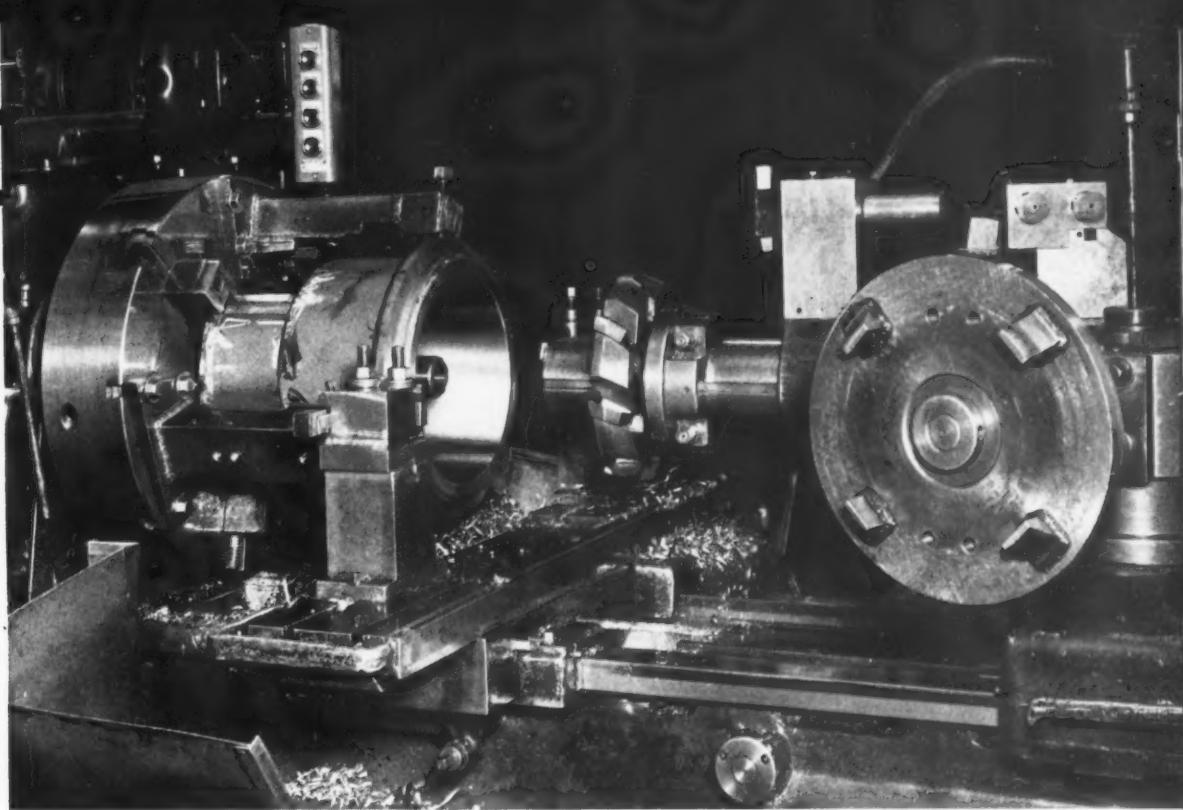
Draw-cut Shaper being Employed for the Accurate Machining of Eight Coil Seats around the Inside of a Motor Frame for an Industrial Locomotive
